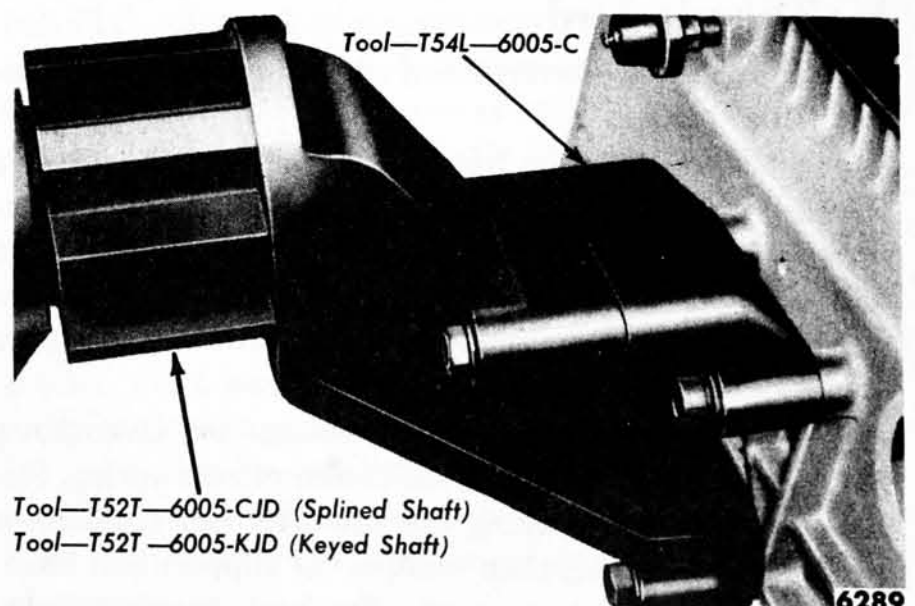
Engine Mount Adapter—6-Cylinder Engine
